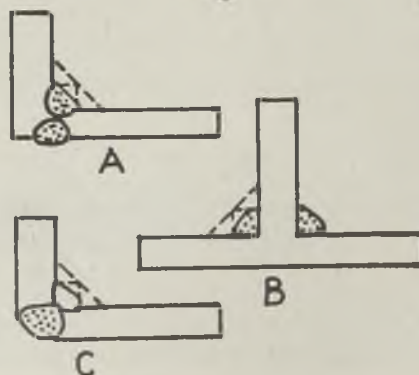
(Right)—Fillet welds such as those shown here also can easily be overwelded. Weld bead measurement by inspectors is method of controlling this factor
